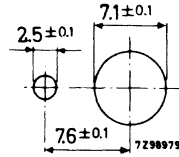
Mounting holes for potentiometers with mounting bushings.
